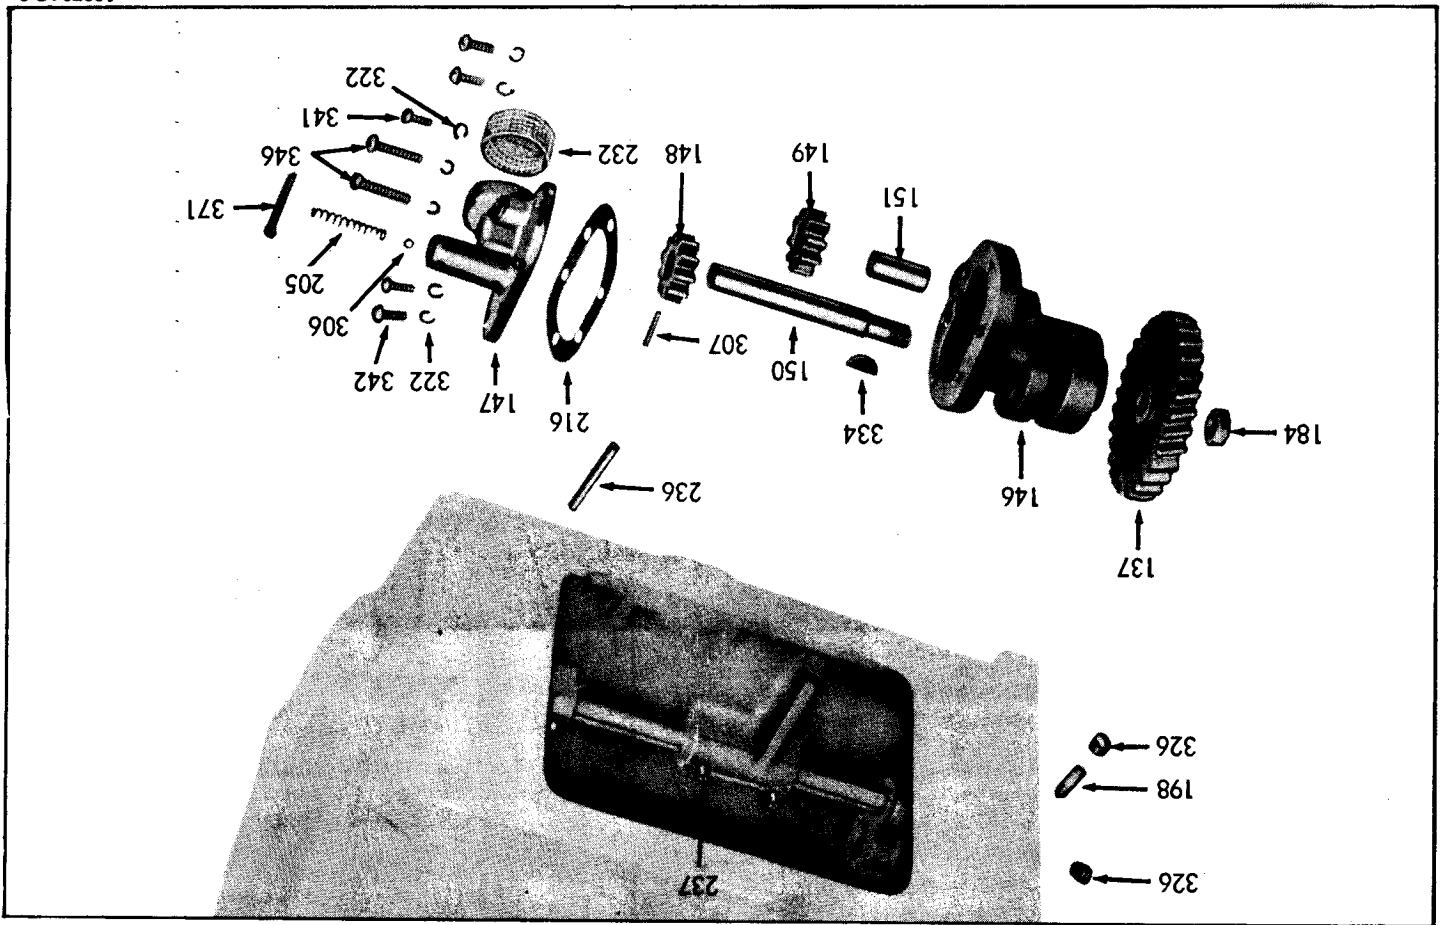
, Ref. No. 144, OIL PUMP ASSEMBLY
